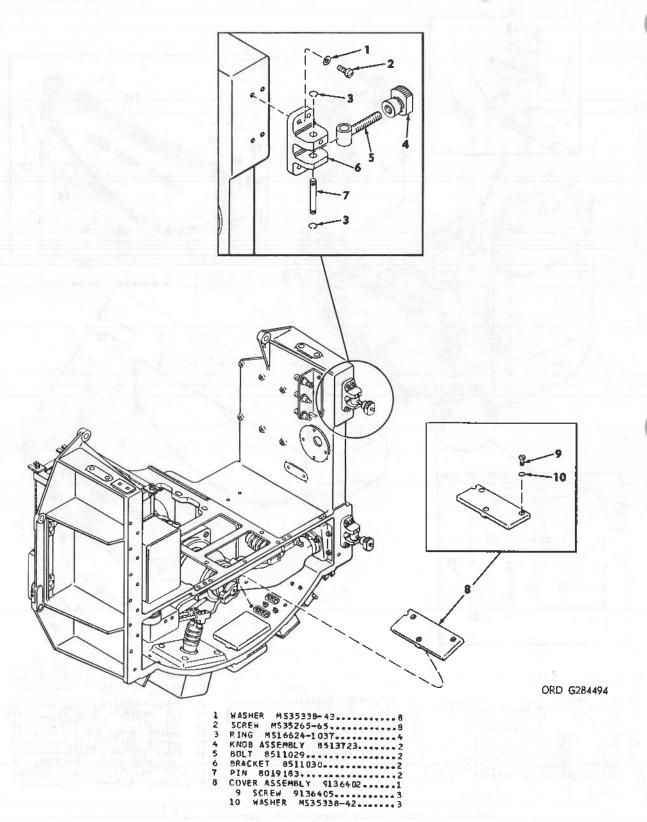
MODULATOR /8172445/-PARTIAL EXPLODED VIEW
